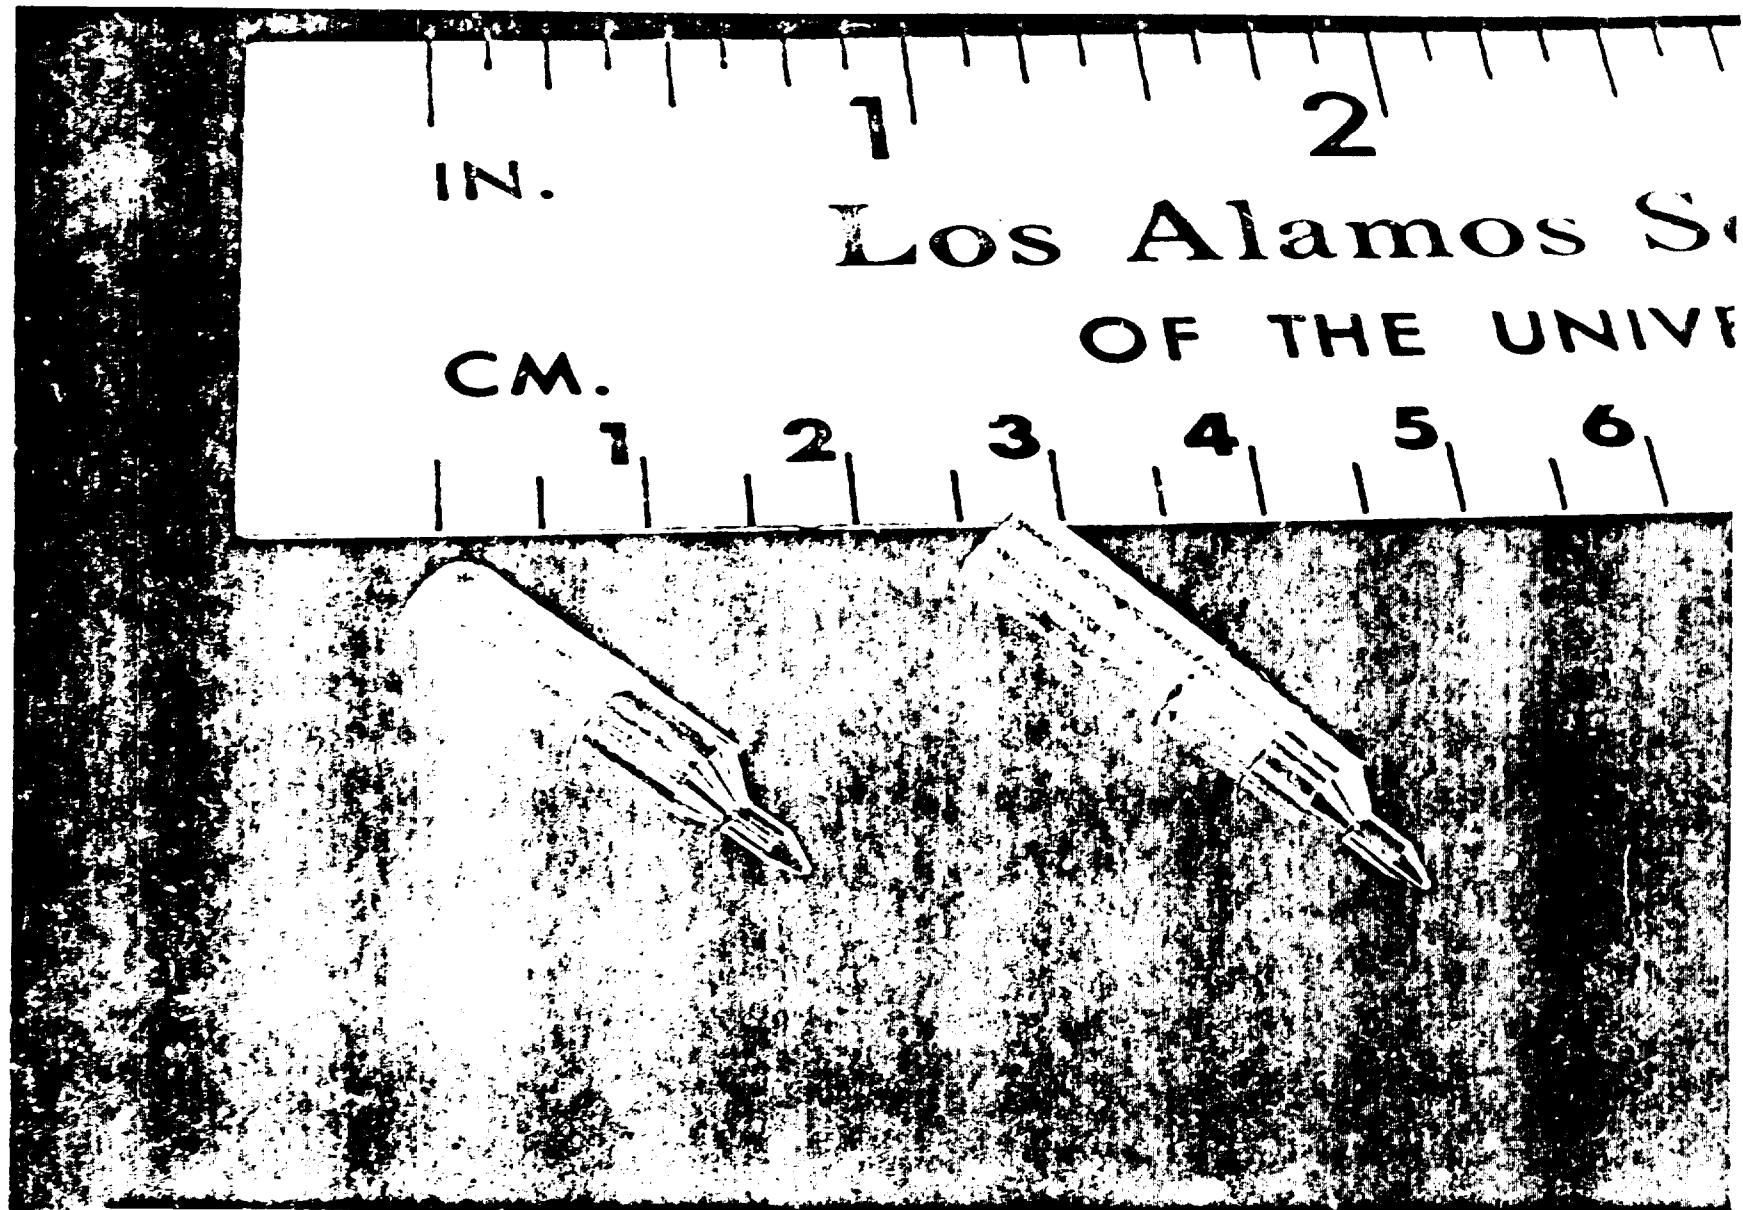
PHOTOGRAPH OF TEST PIECE
